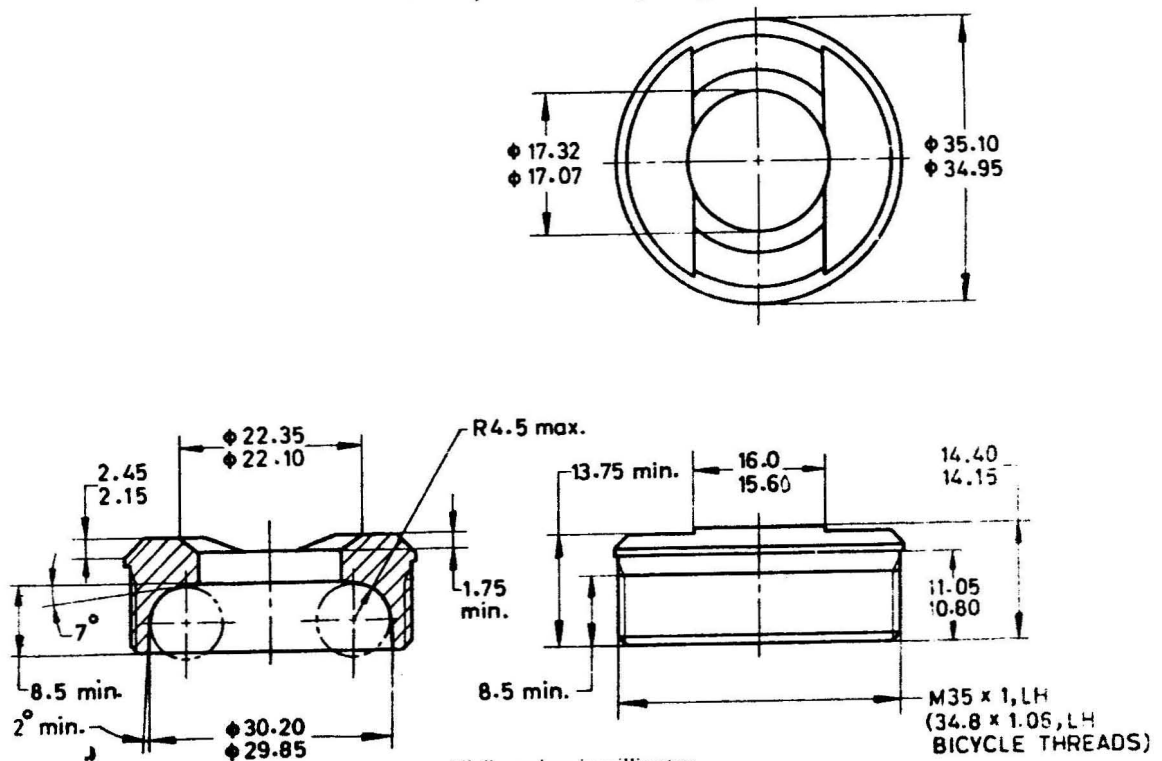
THREADED BALL CUP SET 'PH' TYPE
